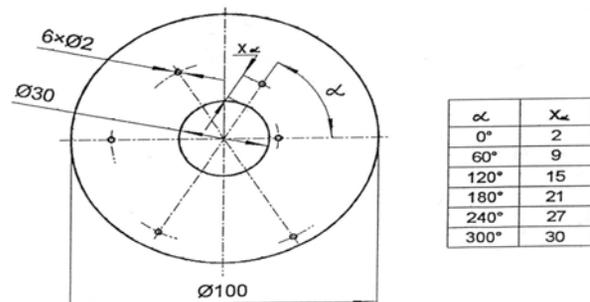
Scheme of spacing the holes for thermocouples in the test mould.
